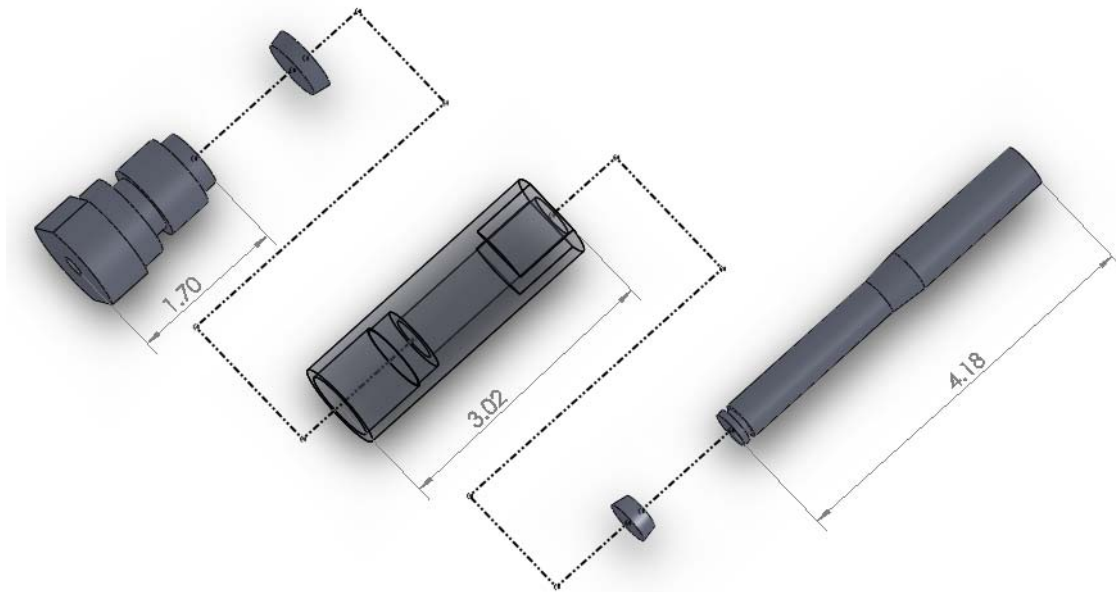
Exploded view of proppant crush test cell. The base plug screws into the tube and holds the lower carbide insert in place. Crushing force applied by the load frame is transmitted to the proppant pack via the rod and upper carbide insert. Size measurements, in inches, are provided for scale reference.
